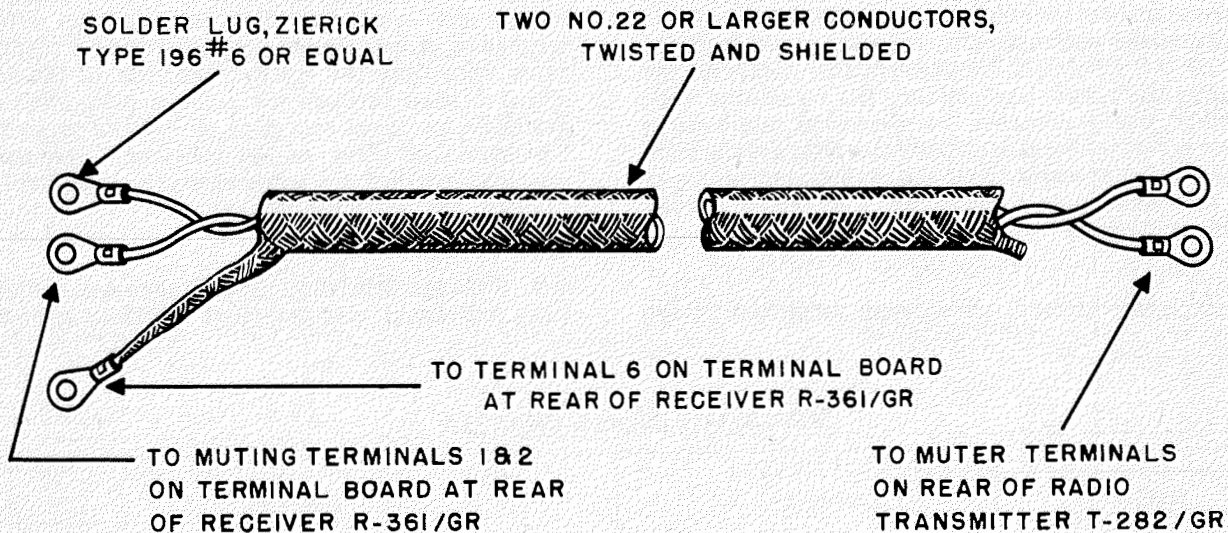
Radio Receiver R-361/GR, Muting Cable Assembly
